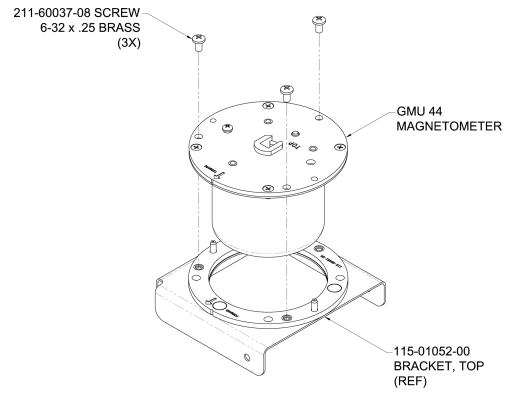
Lancair IV/IV-P GMU 44 Mounting Bracket
